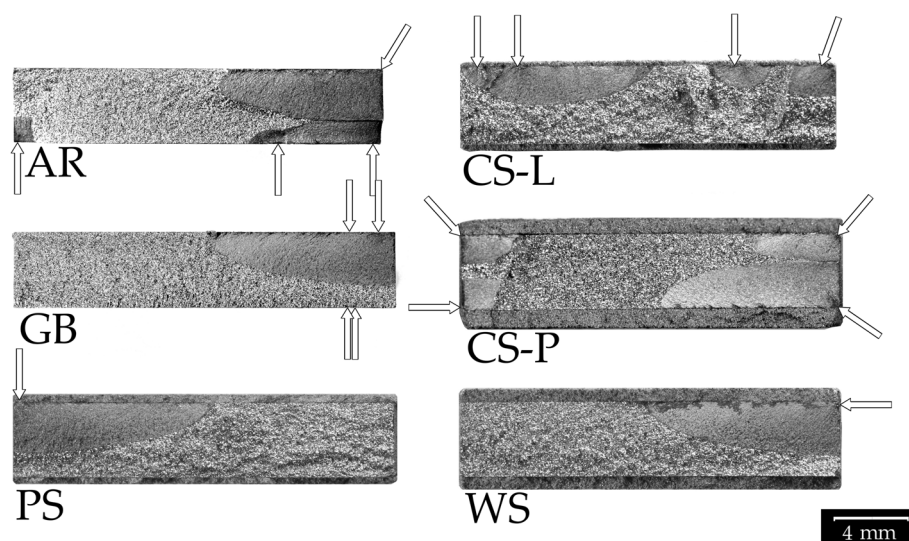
Typical fractured surfaces and fatigue crack shapes of the six tested sets. The arrows indicate the cracks initiation sites and propagation directions. The orientation of the surfaces could be seen from A-A section in Fig. 2
